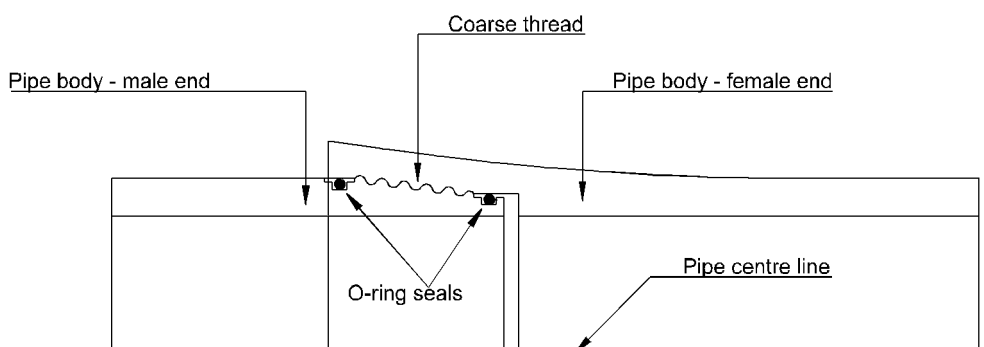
Integral thread (coarse thread + O-ring seals)
